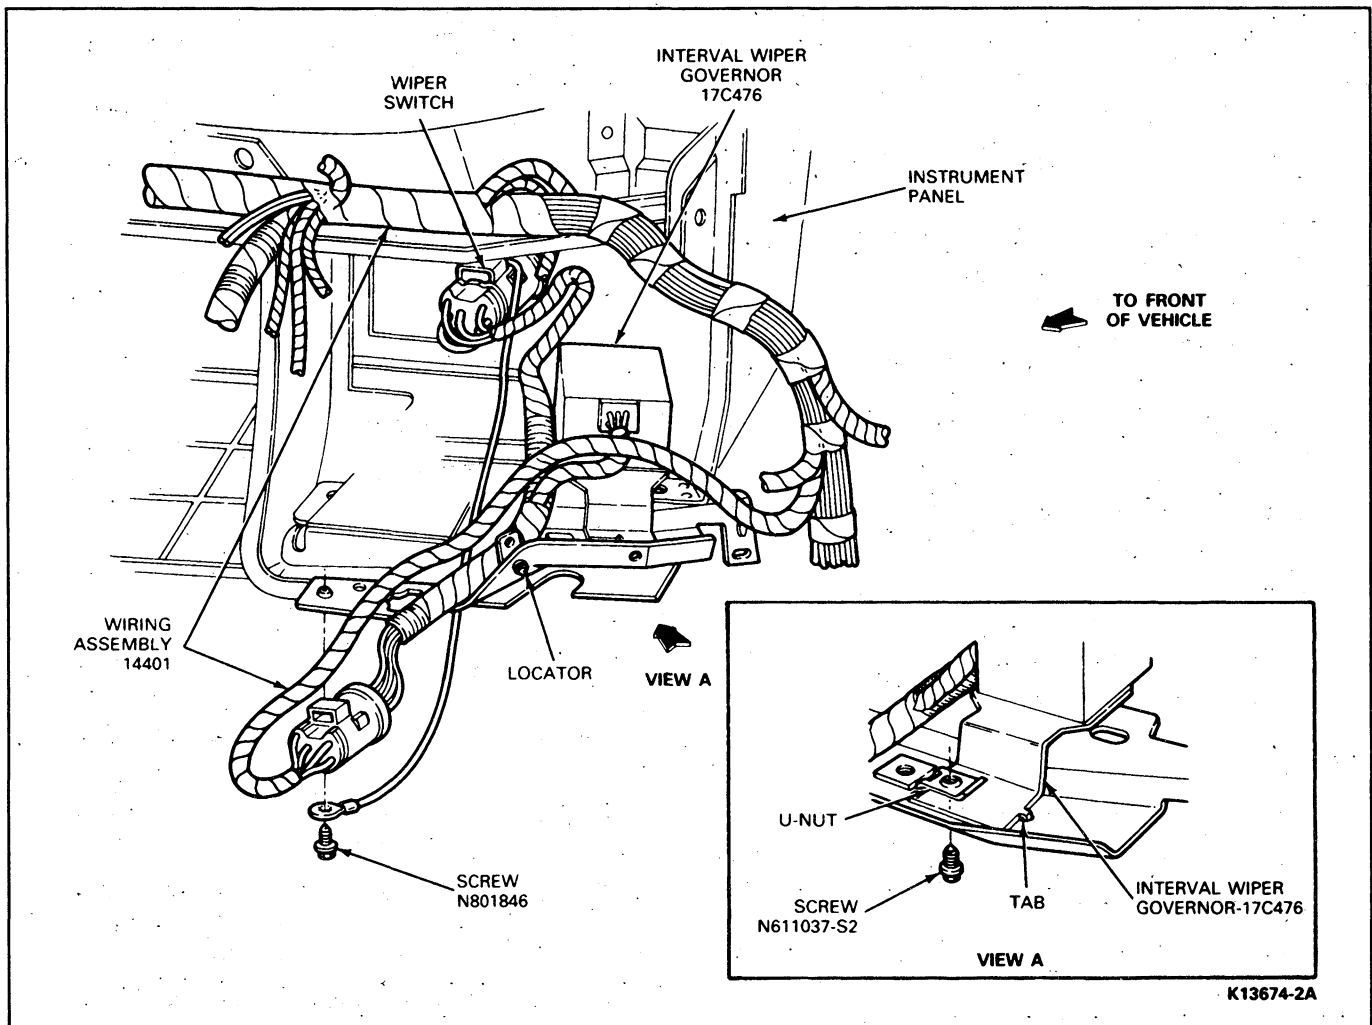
Windshield Wiper Interval Governor—Typical (F-Series and Bronco Shown)
